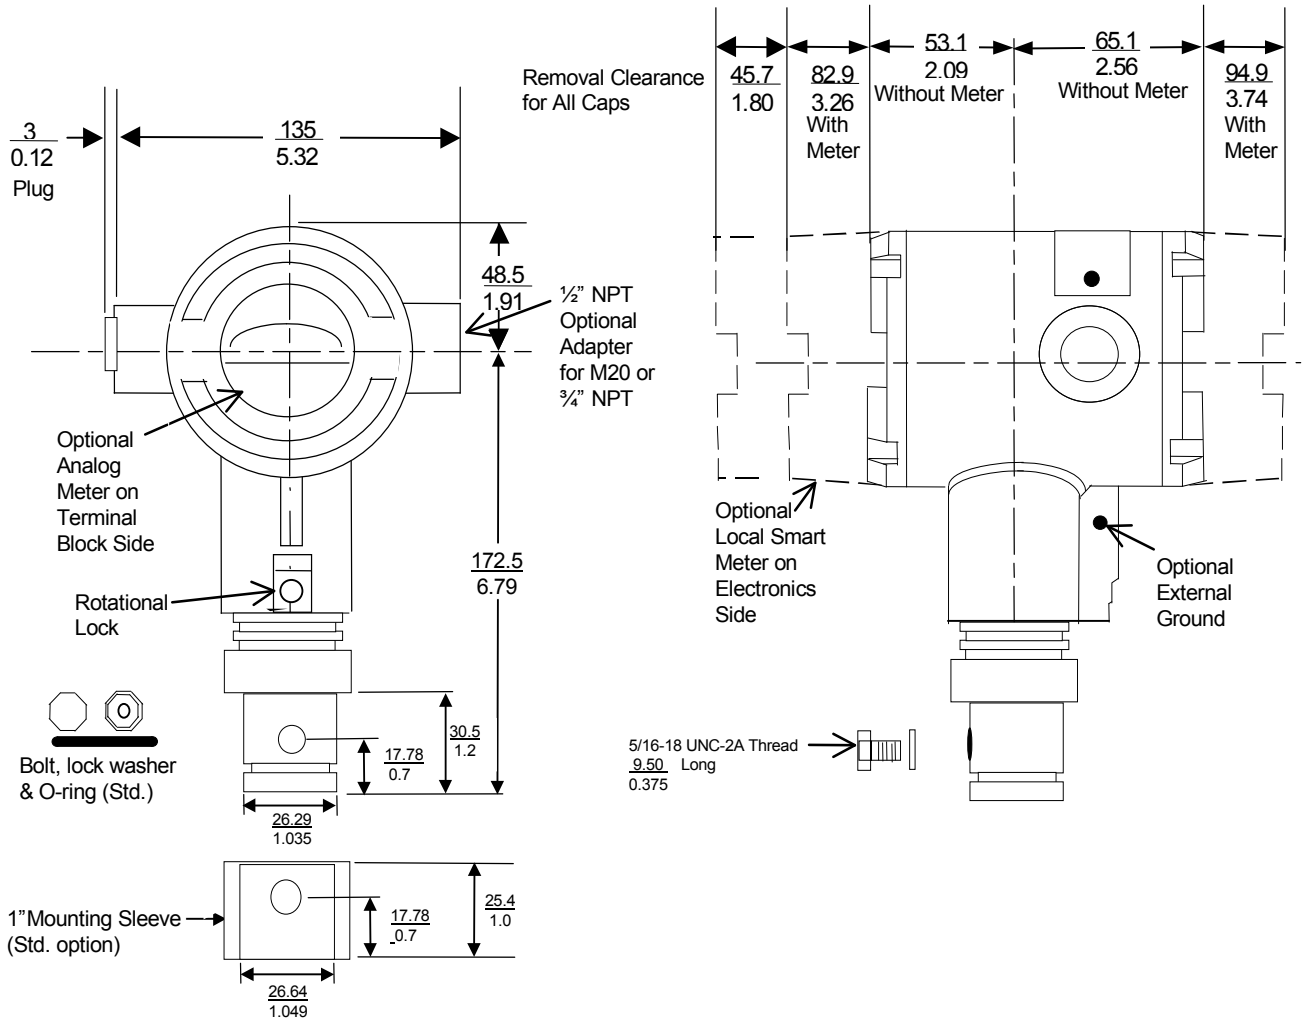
Typical Mounting Dimensions for 1" Flush Mount Transmitter
